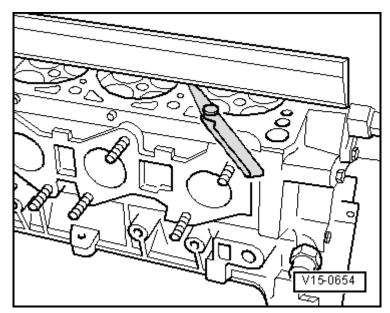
Checking Cylinder Head For Distortion Courtesy of VOLKSWAGEN GROUP OF AMERICA, INC.
